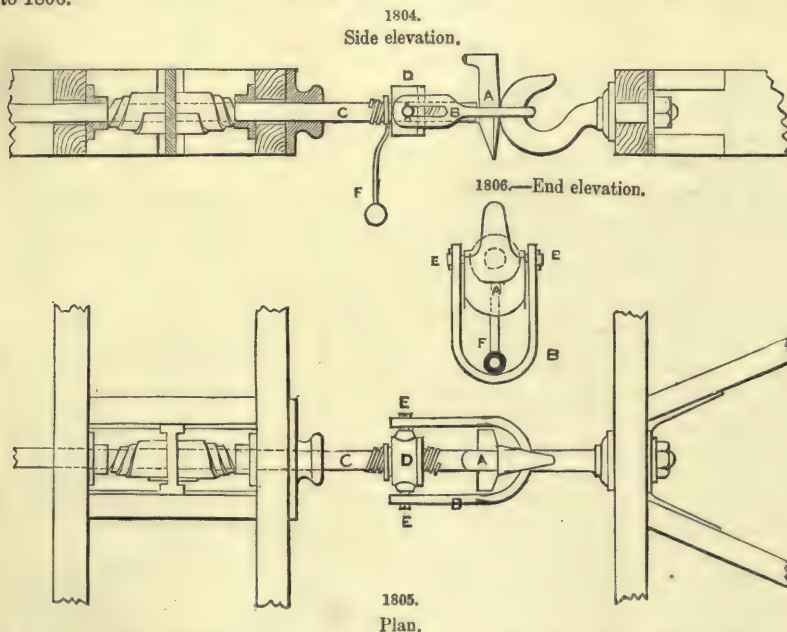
is a side elevation, and Fig. 1805 a plan of the new coupling, working in connection with an ordinary draw-hook; and Fig. 1806 is an end view of the buffer-head. The buffer and draw-hook are constructed in one piece, and the buffer-head *A*, instead of being circular, is made of the peculiar form shown in Fig. 1806. The lower portion only is curvilinear, and the upper part is made narrow, and while presenting a buffing surface in front, it is shaped on its inner side similar to a *draw-hook*, for the purpose of receiving the coupling-link *B*, which works upon it as upon an ordinary draw-hook, and thus forms a complete hook and link connection. The draw-rod *C* is screwed near the end just within the buffer-head. Upon this screwed part is fitted the
